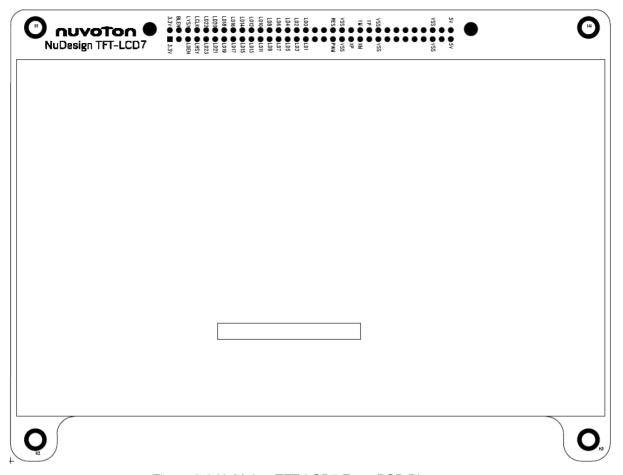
NuMaker-TFT-LCD7 Front PCB Placement
